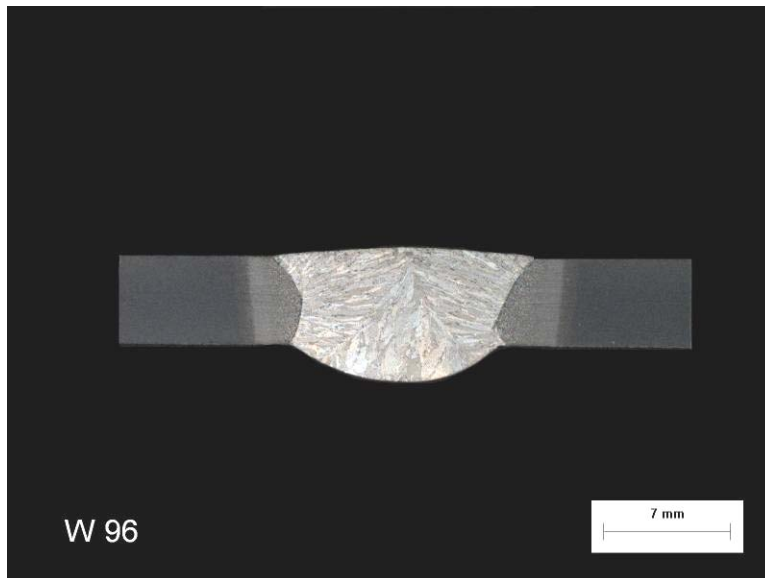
Macrograph of Weld on 5-mm Plate (W96)
